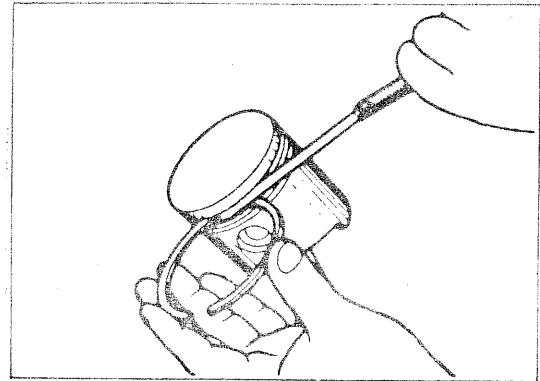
J. Checking Ring Groove to Ring Clearance
